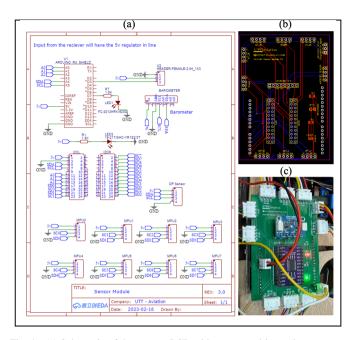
(a) Schematic of the custom PCB with upper- and lower-layer copper traces shown in (b). Completed PCB shown in (c).
